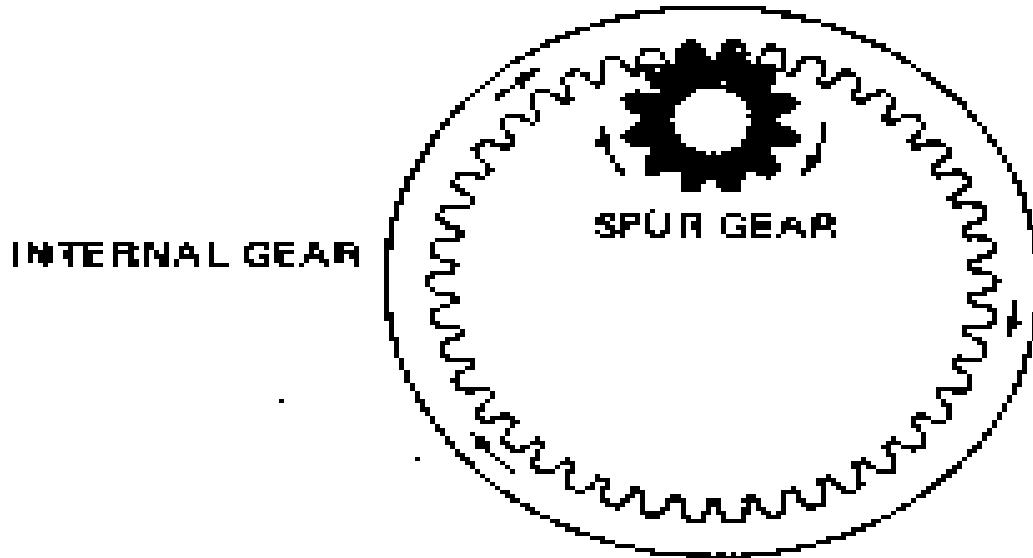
If one Internal Gear is Used with one External Gear, Both the Driving and Driven Gears Turn in the Same Direction
